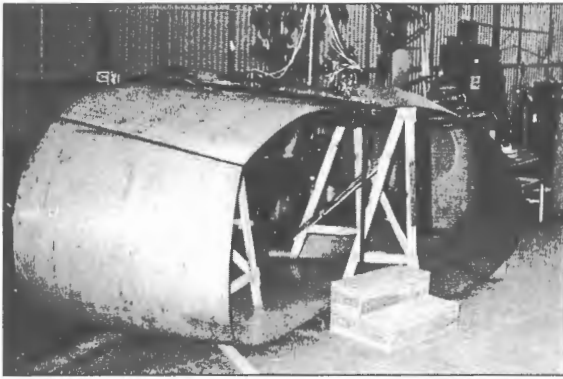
Closing butt of the weld of a conical shell assembled for welding in the berth
